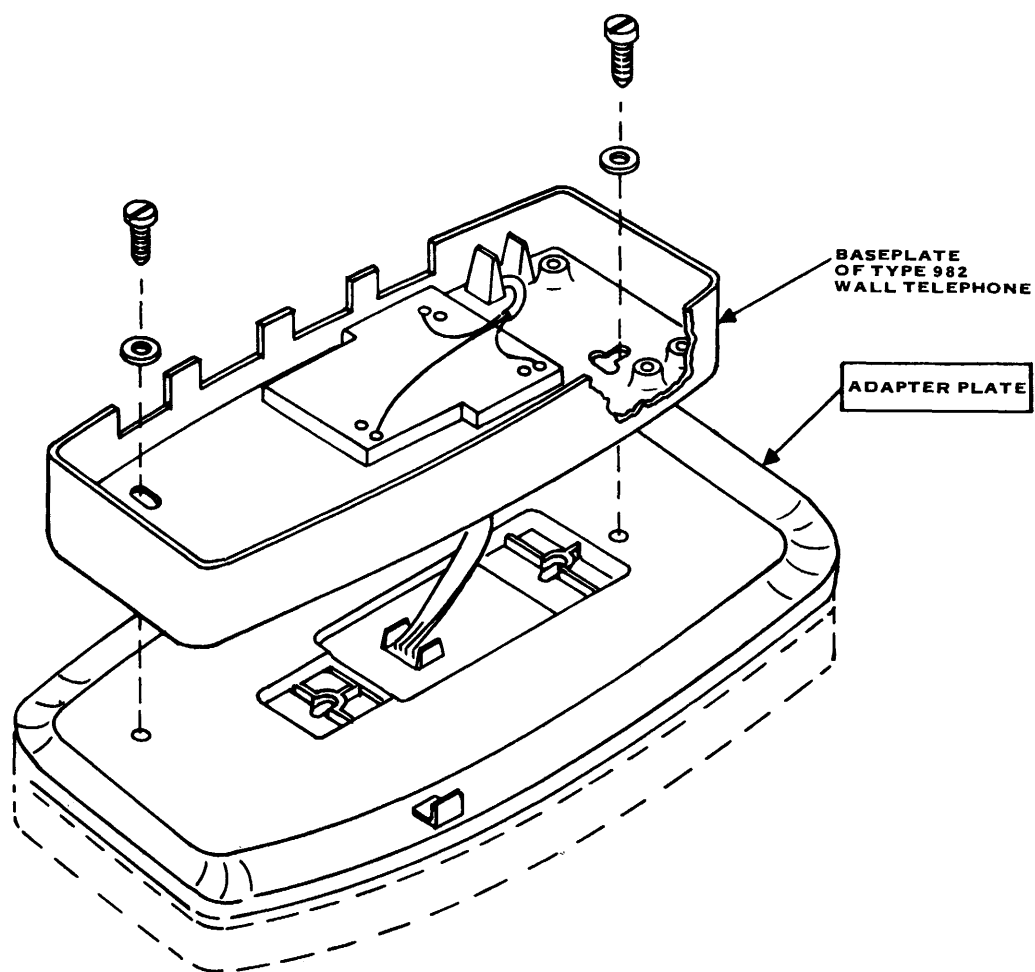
Installation of Type 982A Wall Telephone on Adapter Plate.
